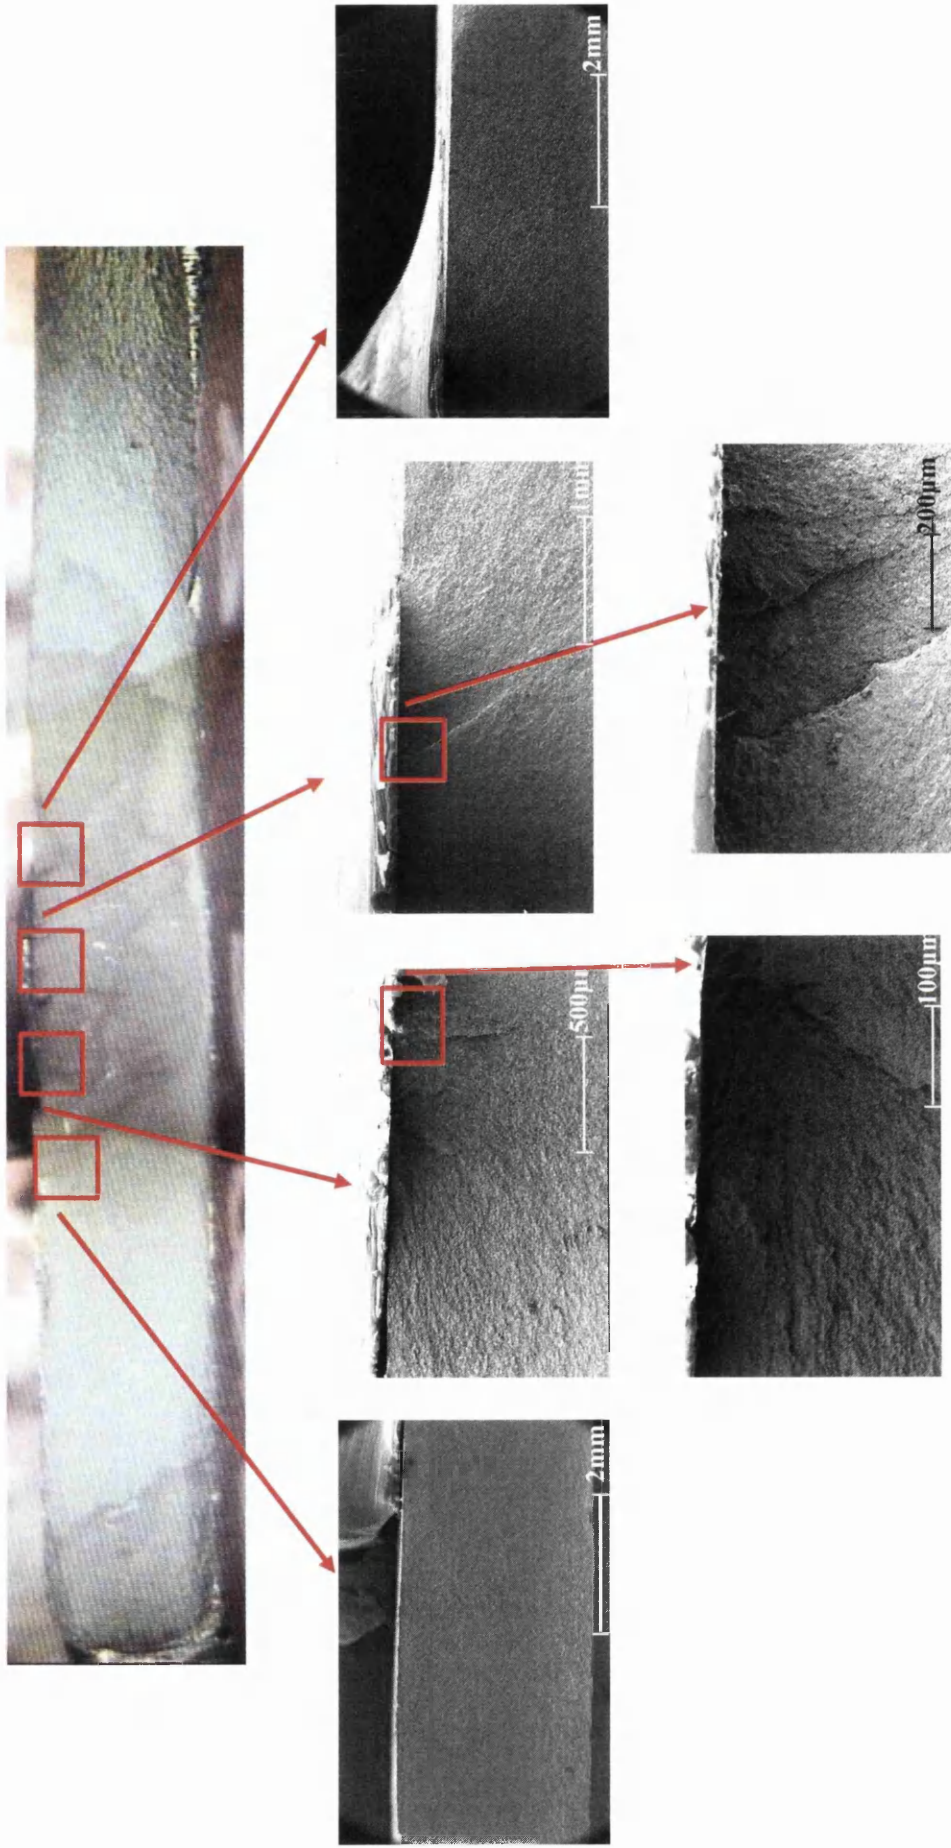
Typical Fracture Surface for GM5 Weld Throat Failure – Weld View
